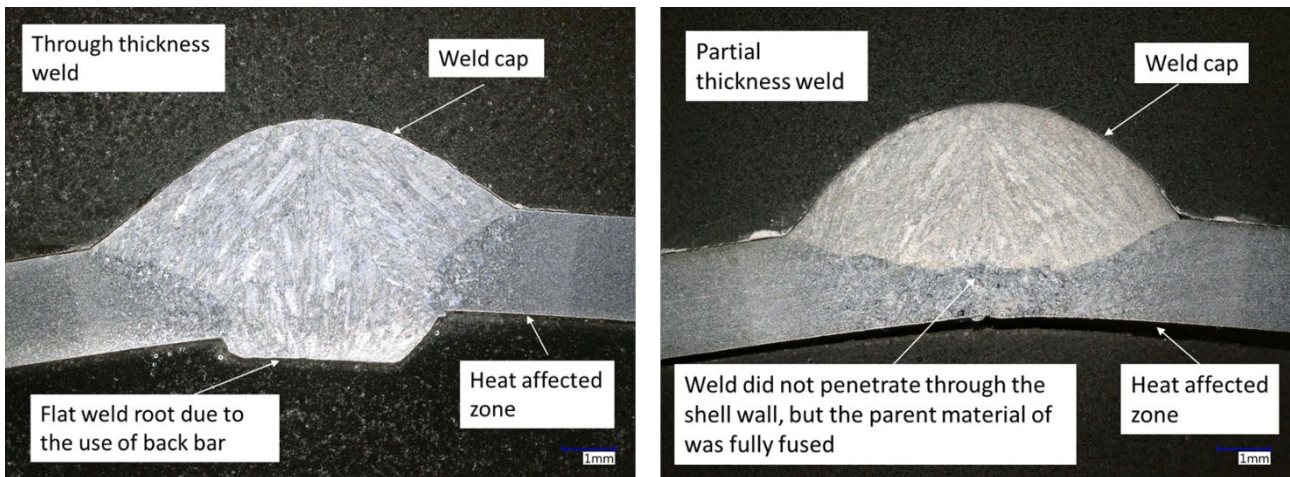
Light microscope images showing cross-sections comparing through thickness and partial thickness welds
